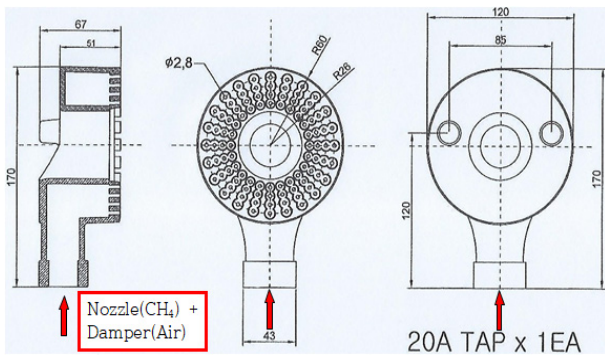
Shape and dimensions of cast iron burner (unit: mm).
